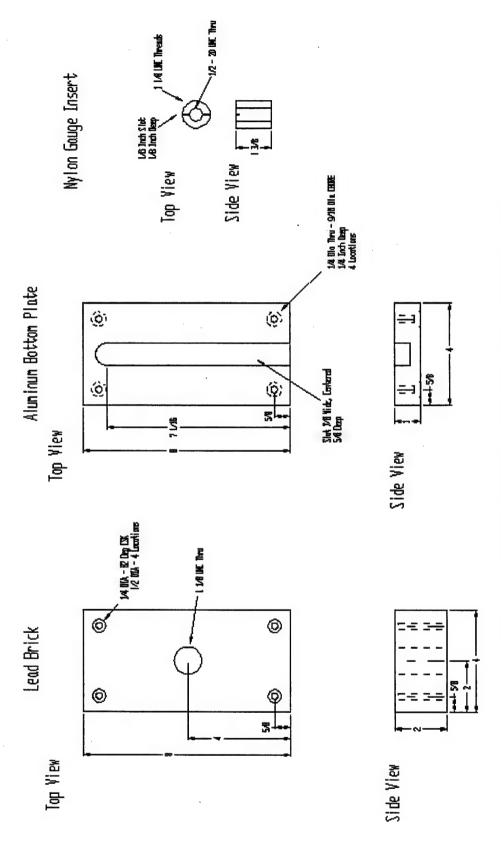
Engineering drawing of lead "pig" pressure transducer mount.
